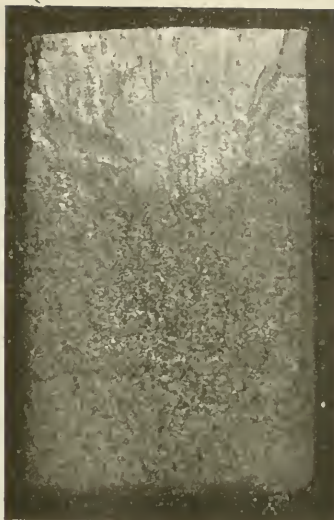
Good wheel mixture. 61 per cent. wheel scrap; 16.5 per cent. charcoal irons. No ferro-manganese in charge or ladle. Chill test of first tap.
